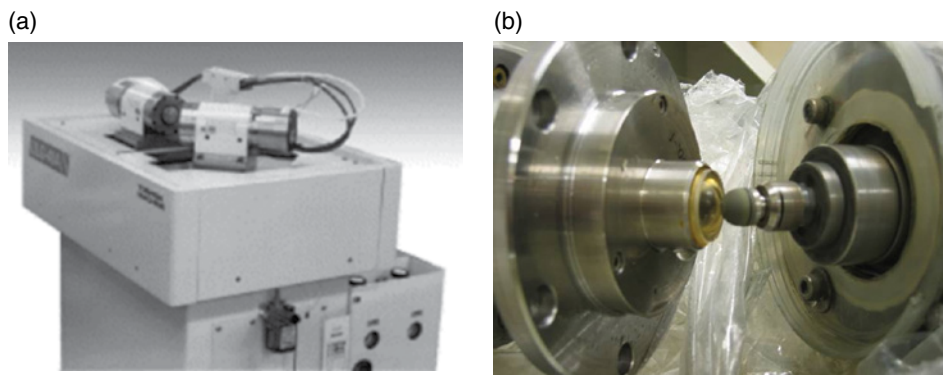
Toshiba ULG-1002 ultraprecision grinding machine used for micro grinding of aspherical moulds made of cemented tungsten carbide. (a) Full view; (b) Grinding set-up
